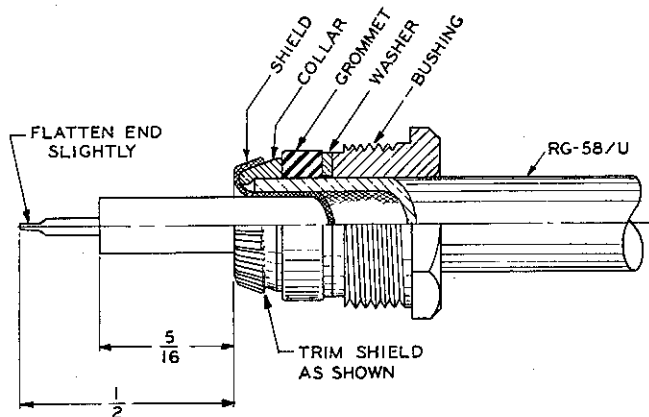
Cable Service For Connector, Plug (D-C Plug P-101)
